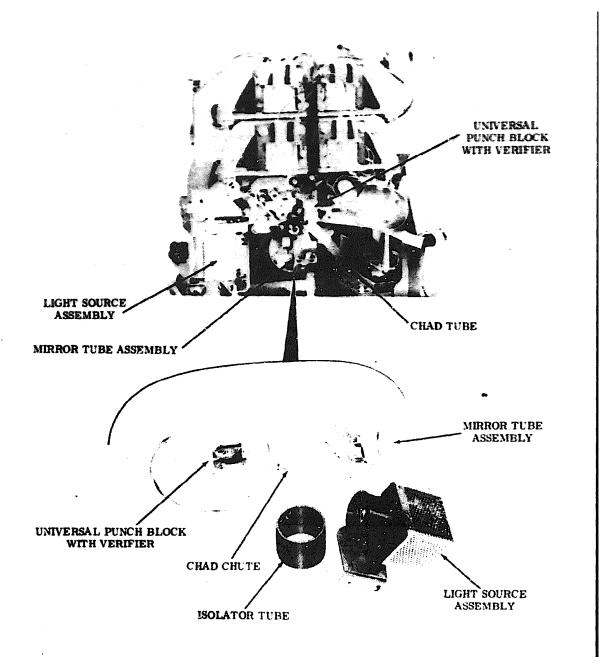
Eight-Level Punch Unit With Photoelectric Reader, Front View
